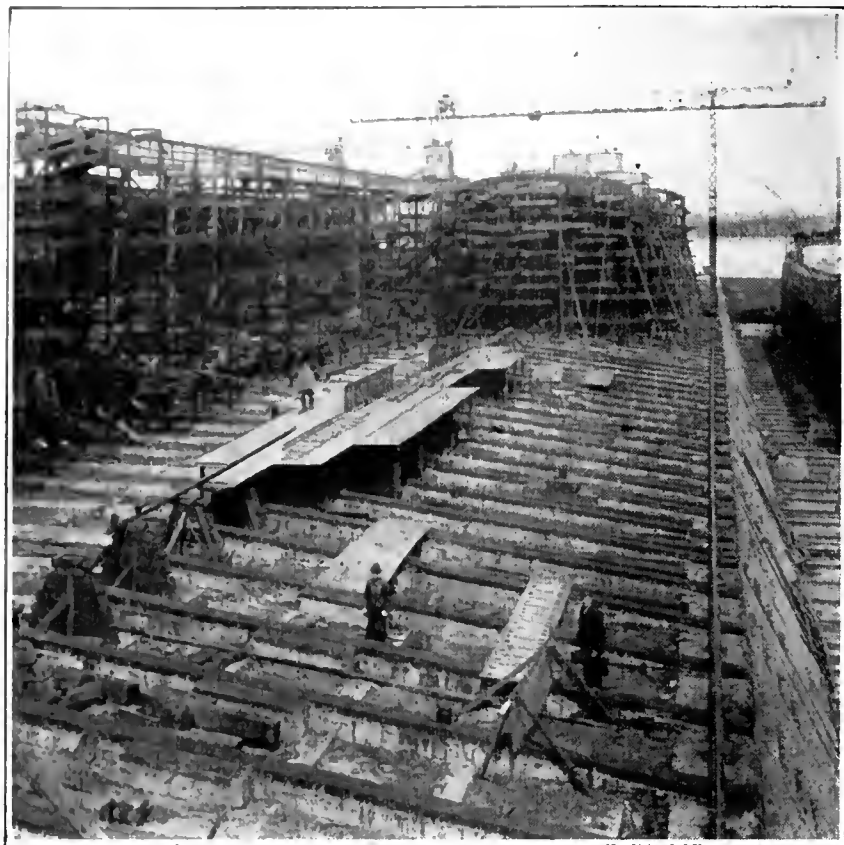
TOLEDO YARD HAS FIXED LAUNCHING WAYS ON CONCRETE BERTH FOUNDATION
